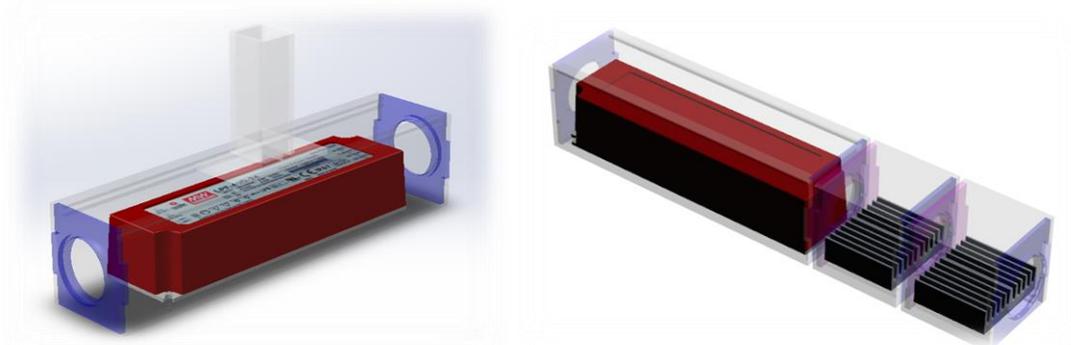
Driver module (left image) and driver module and lighting modules (right image).
